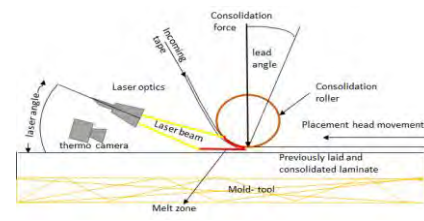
Schematic layout of designed AFP/ATL laboratory head
